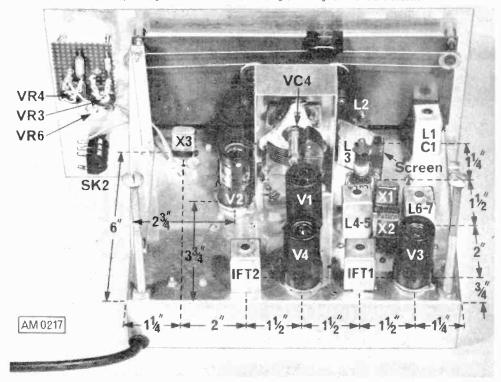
above. Location of the components mounted on the panel is shown in this photograph. The left hand edge of the chassis is indicated to show its position on the panel. Fig. 7: below, identifies the components mounted on top of the chassis. The long bolts, subsequently removed, are of great assistance when working on wiring etc. inside the chassis.
